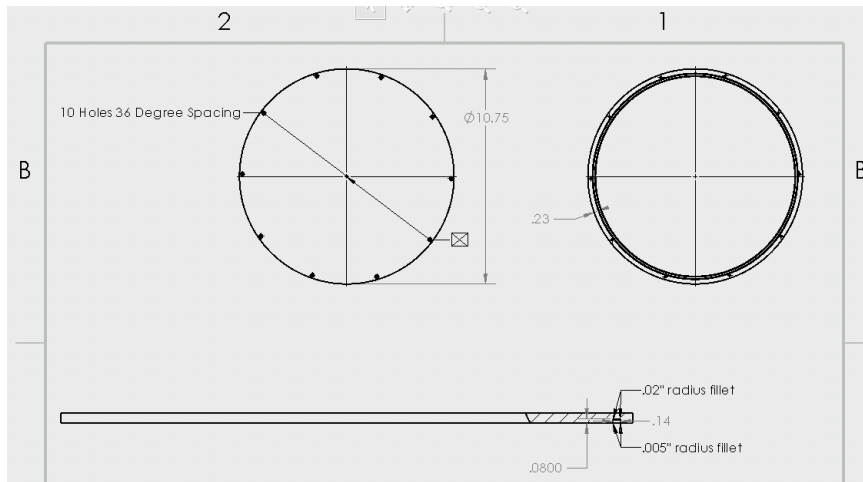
The lid fabrication drawing (SolidWorks, December 2017): ten holes at 36°, 10.75 in outside diameter, and the gland section at right — 0.14 in wide, 0.0800 in deep, 0.02 in and 0.005 in fillets. The drawing settles the width/depth orientation the prose sources swapped (§15).
